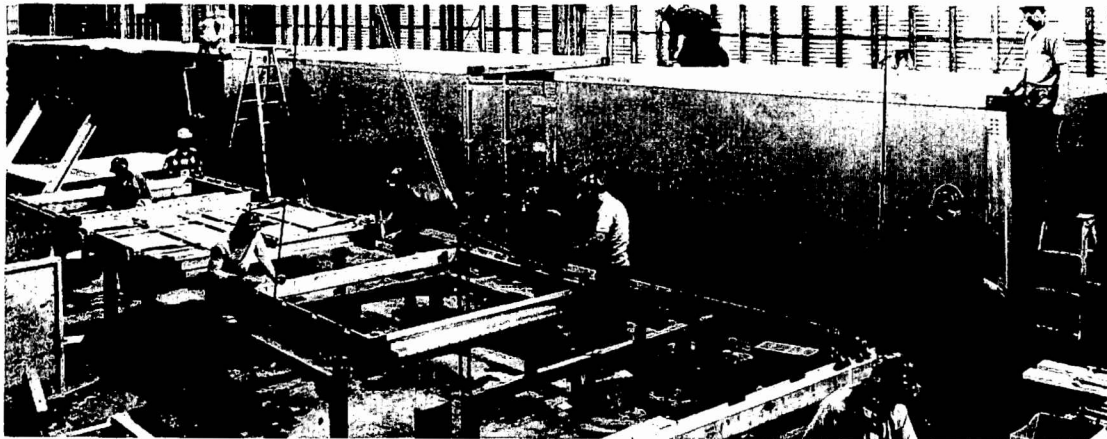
Assembly Operations for FRP/Plywood Type Containers
